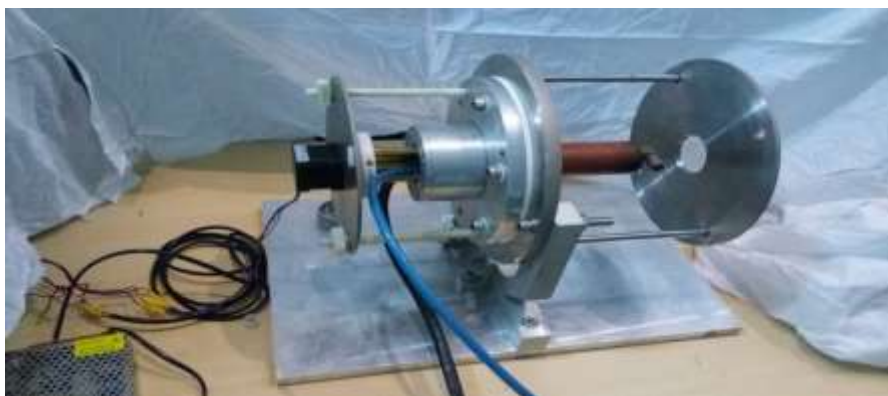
Photograph showing image of internal bore welding torch.
